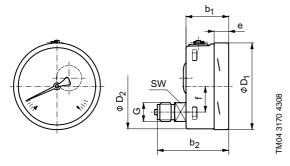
Dimensional sketch of pressure scale with lower back pressure entry (type LBM)
